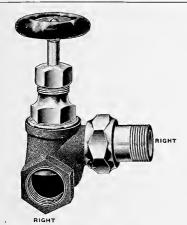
RIGHT-HAND CORNER VALVE WITH UNION.
